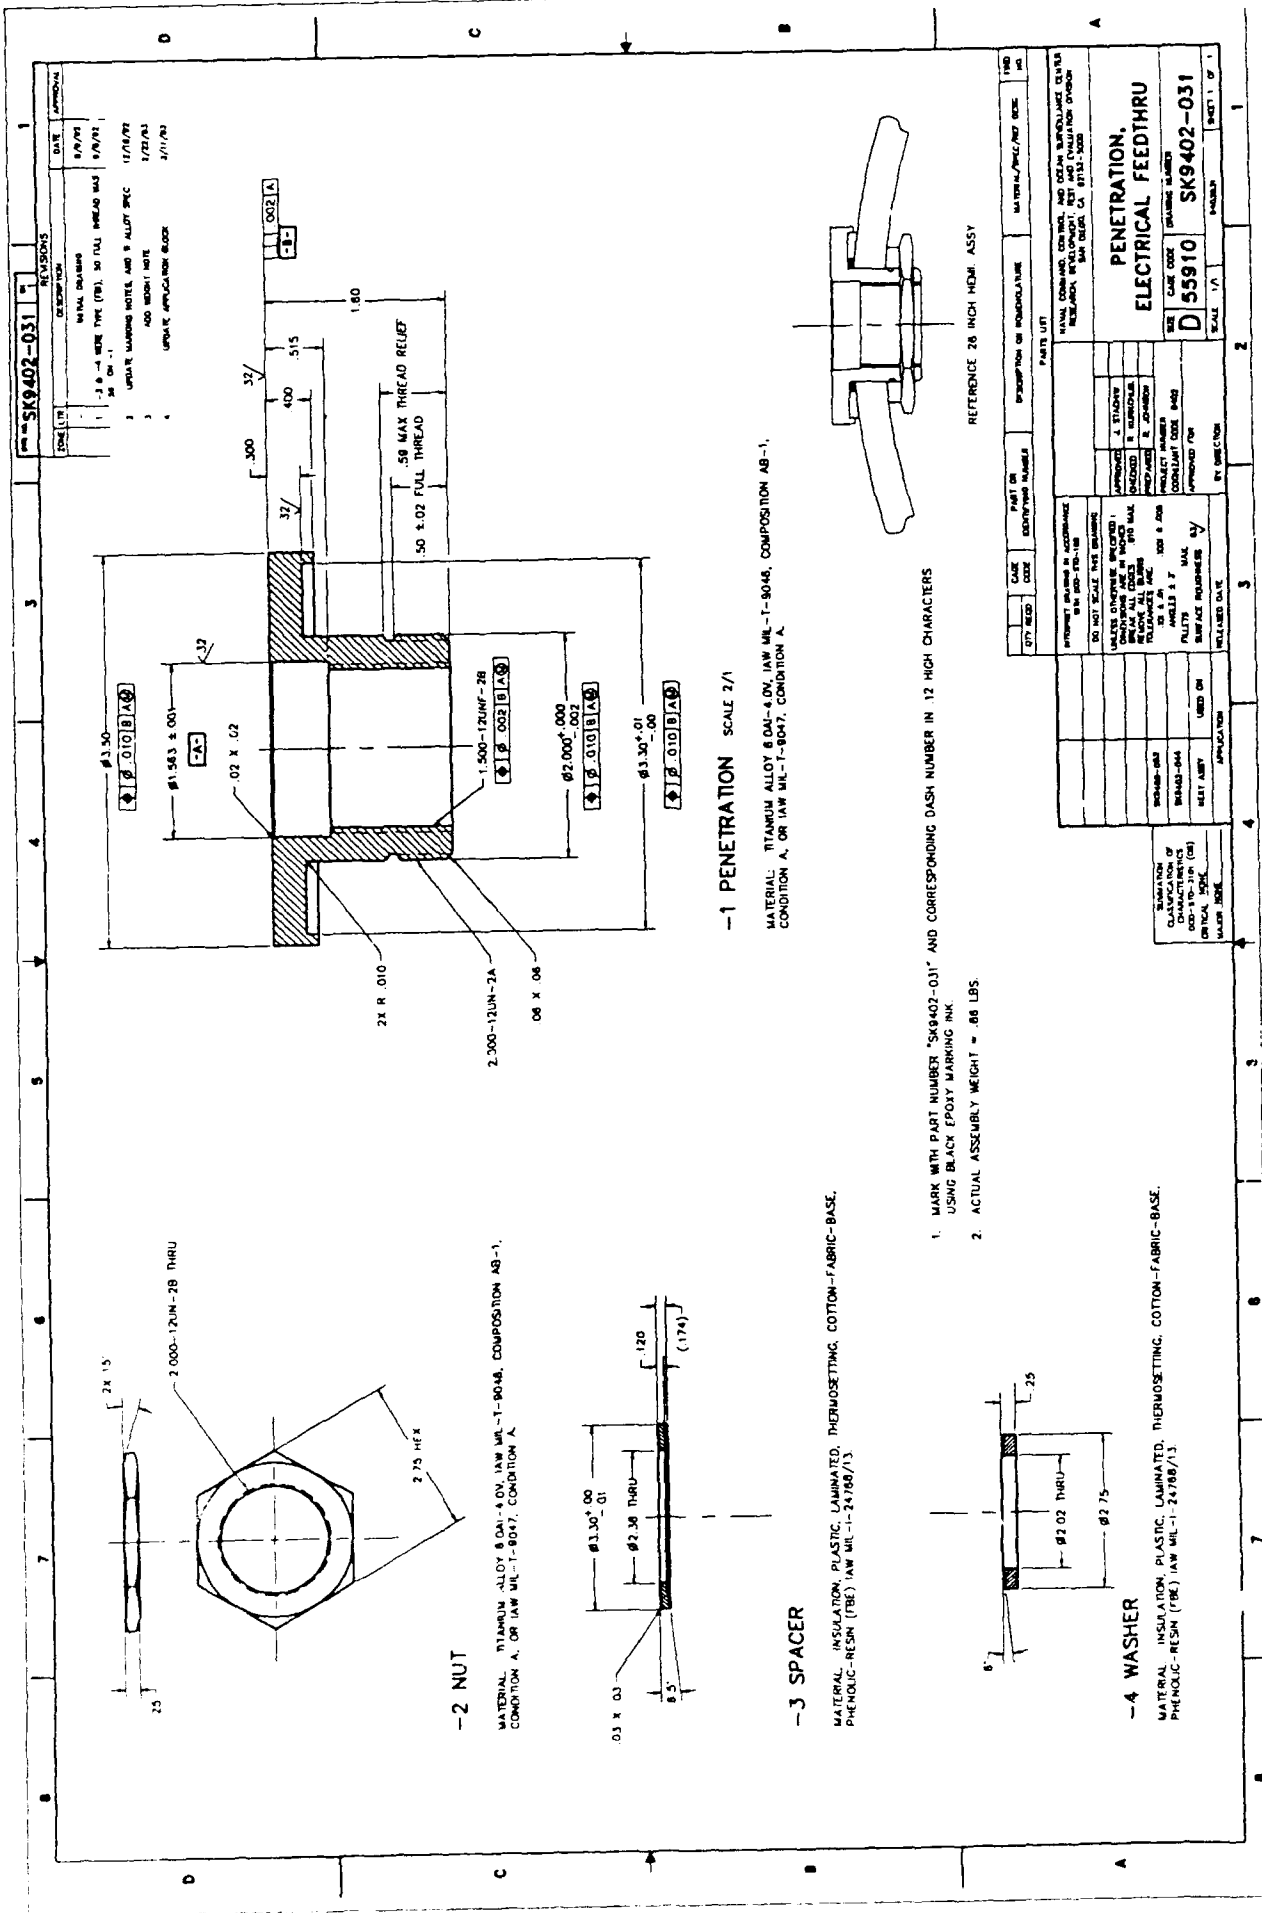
Original design of the electrical-connector insert for the forward head assembly.
